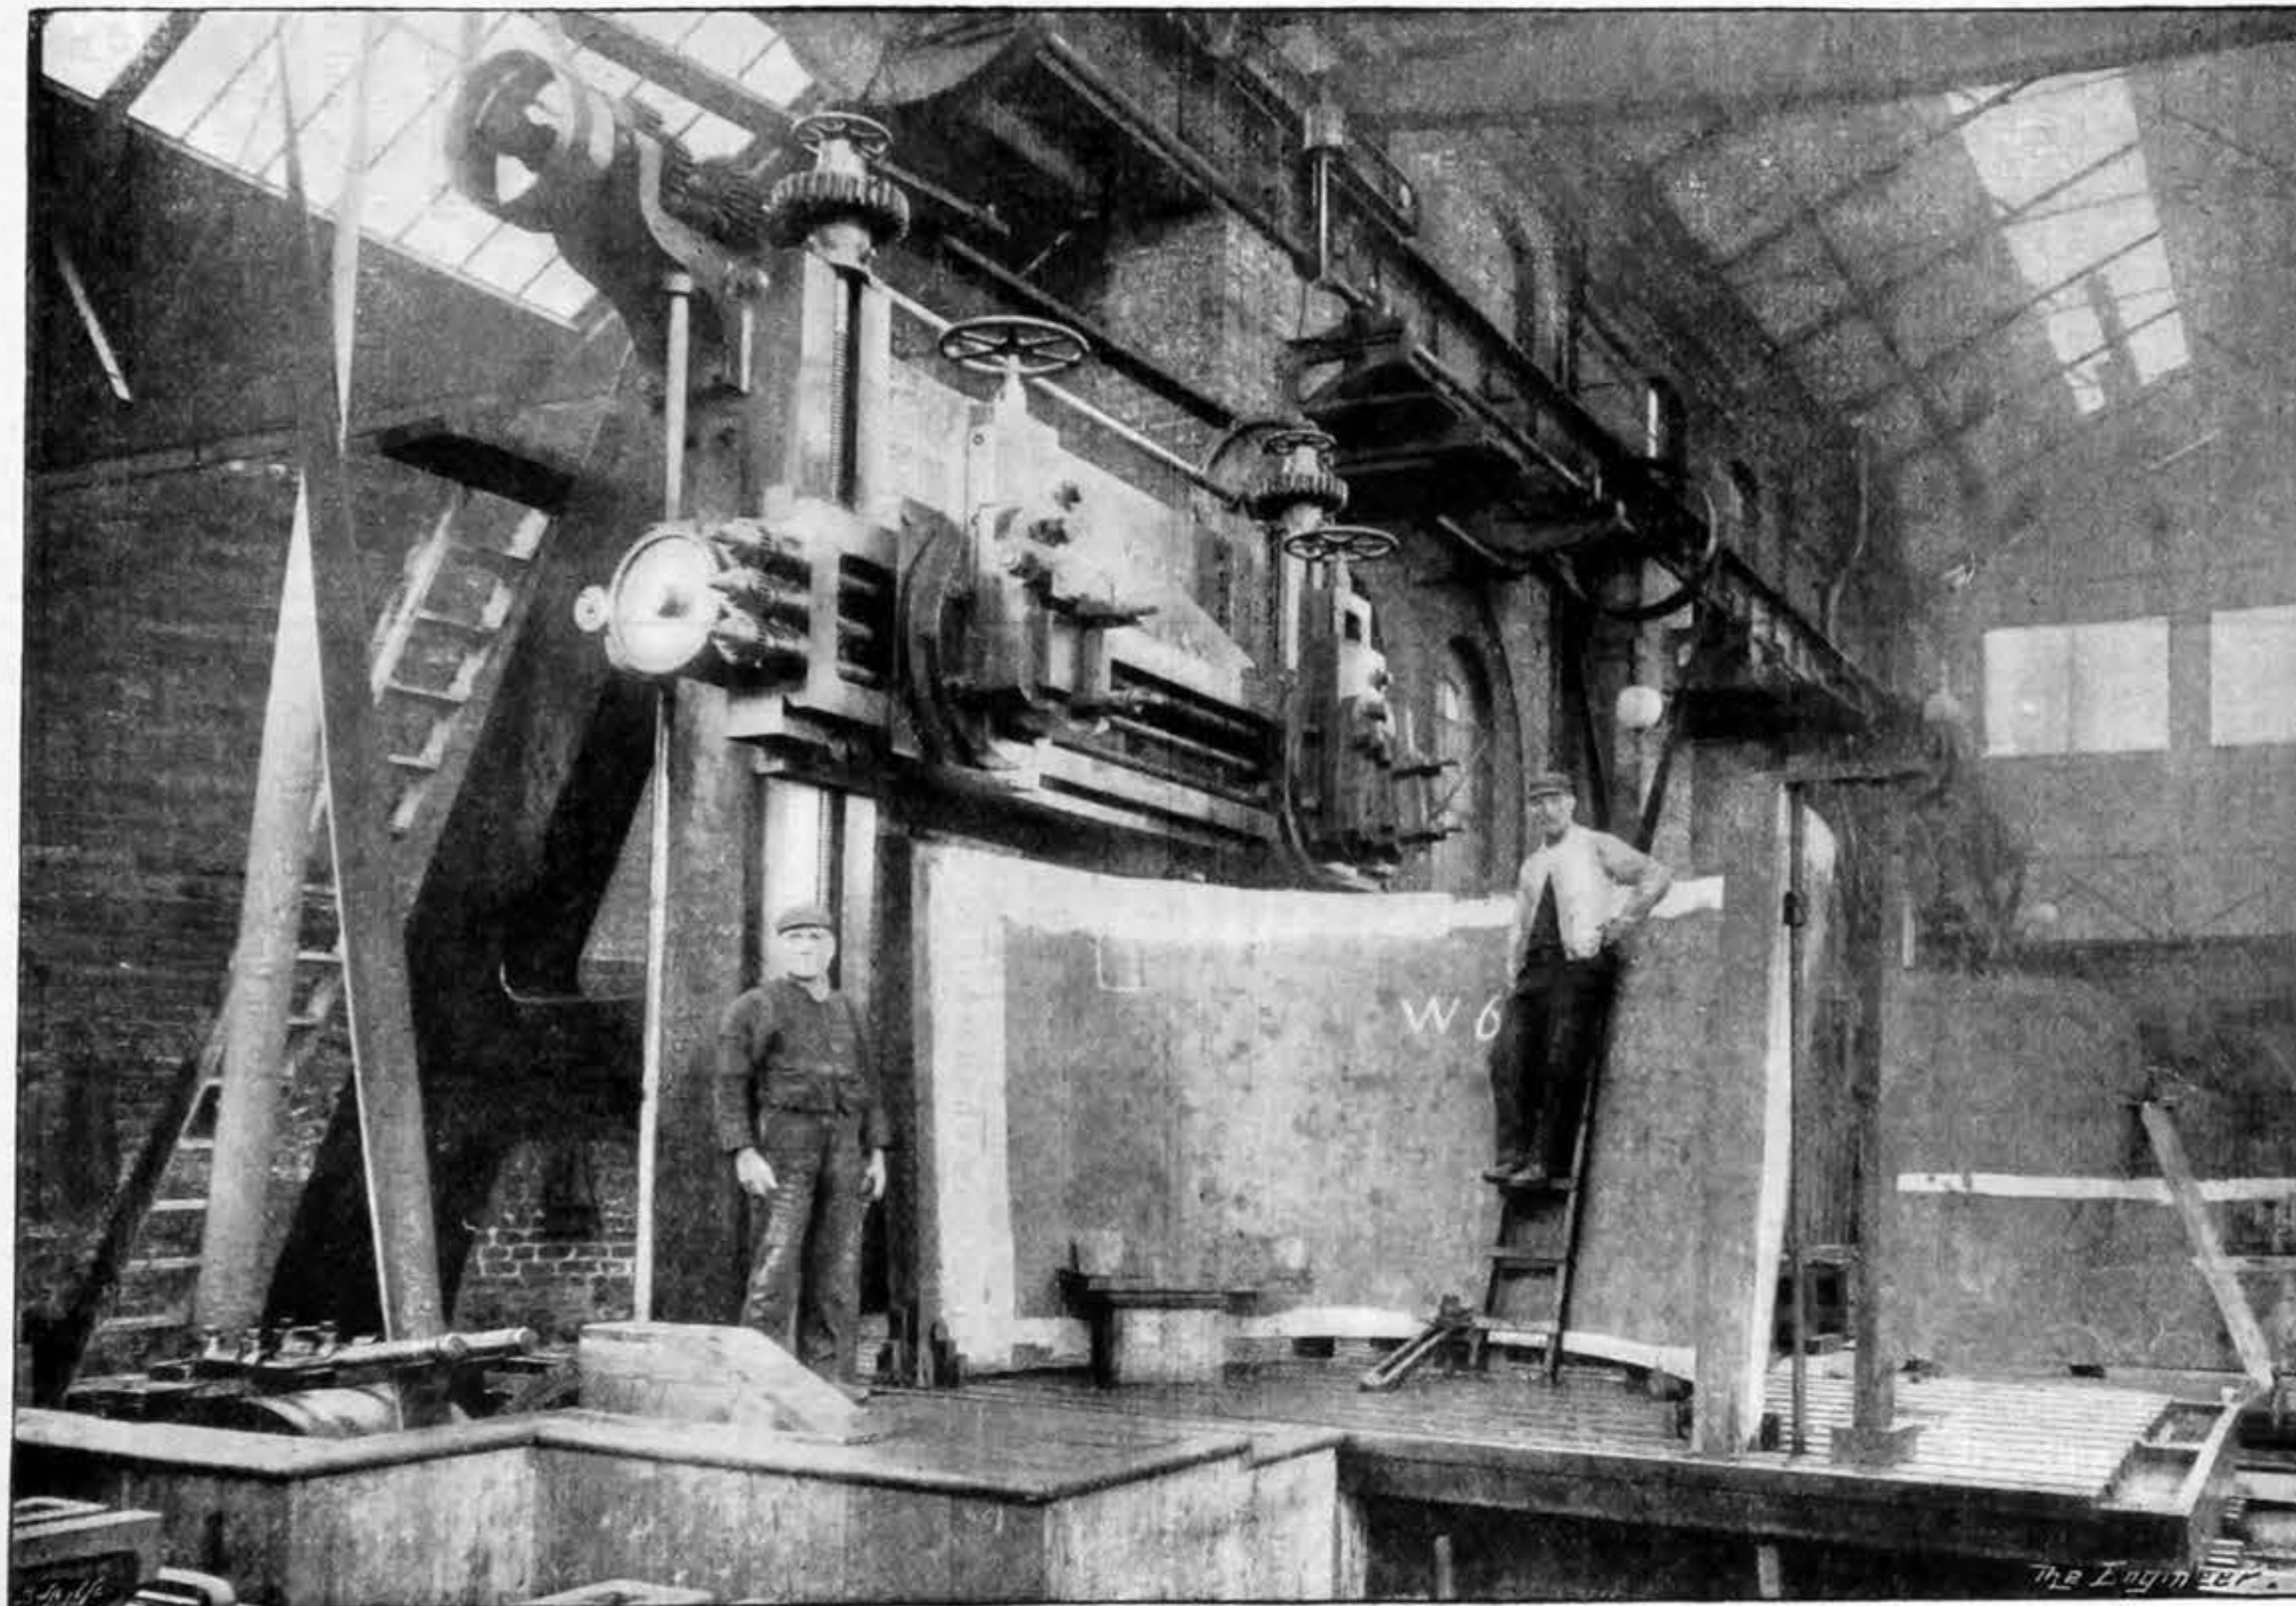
PLANING MACHINE OPERATING UPON GUN SHIELD, 6in. THICK, FOR H.M.S. TERRIBLE
